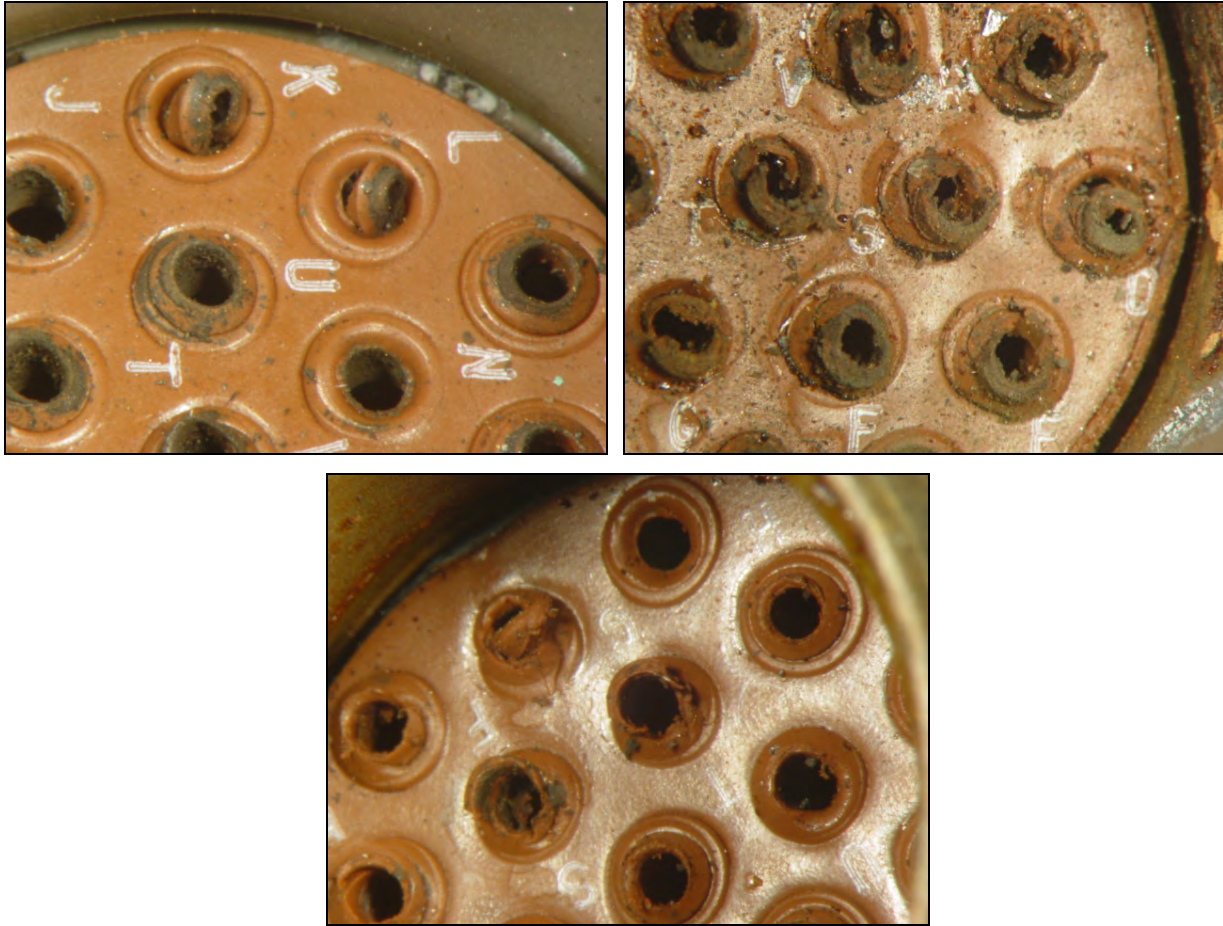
1-2, B1h1-3. The SSG samples of M85049 assemblies had a similar appearance to the control samples, with no chromate conversion coating remaining, and white corrosion product or salt deposits that were difficult to remove.
